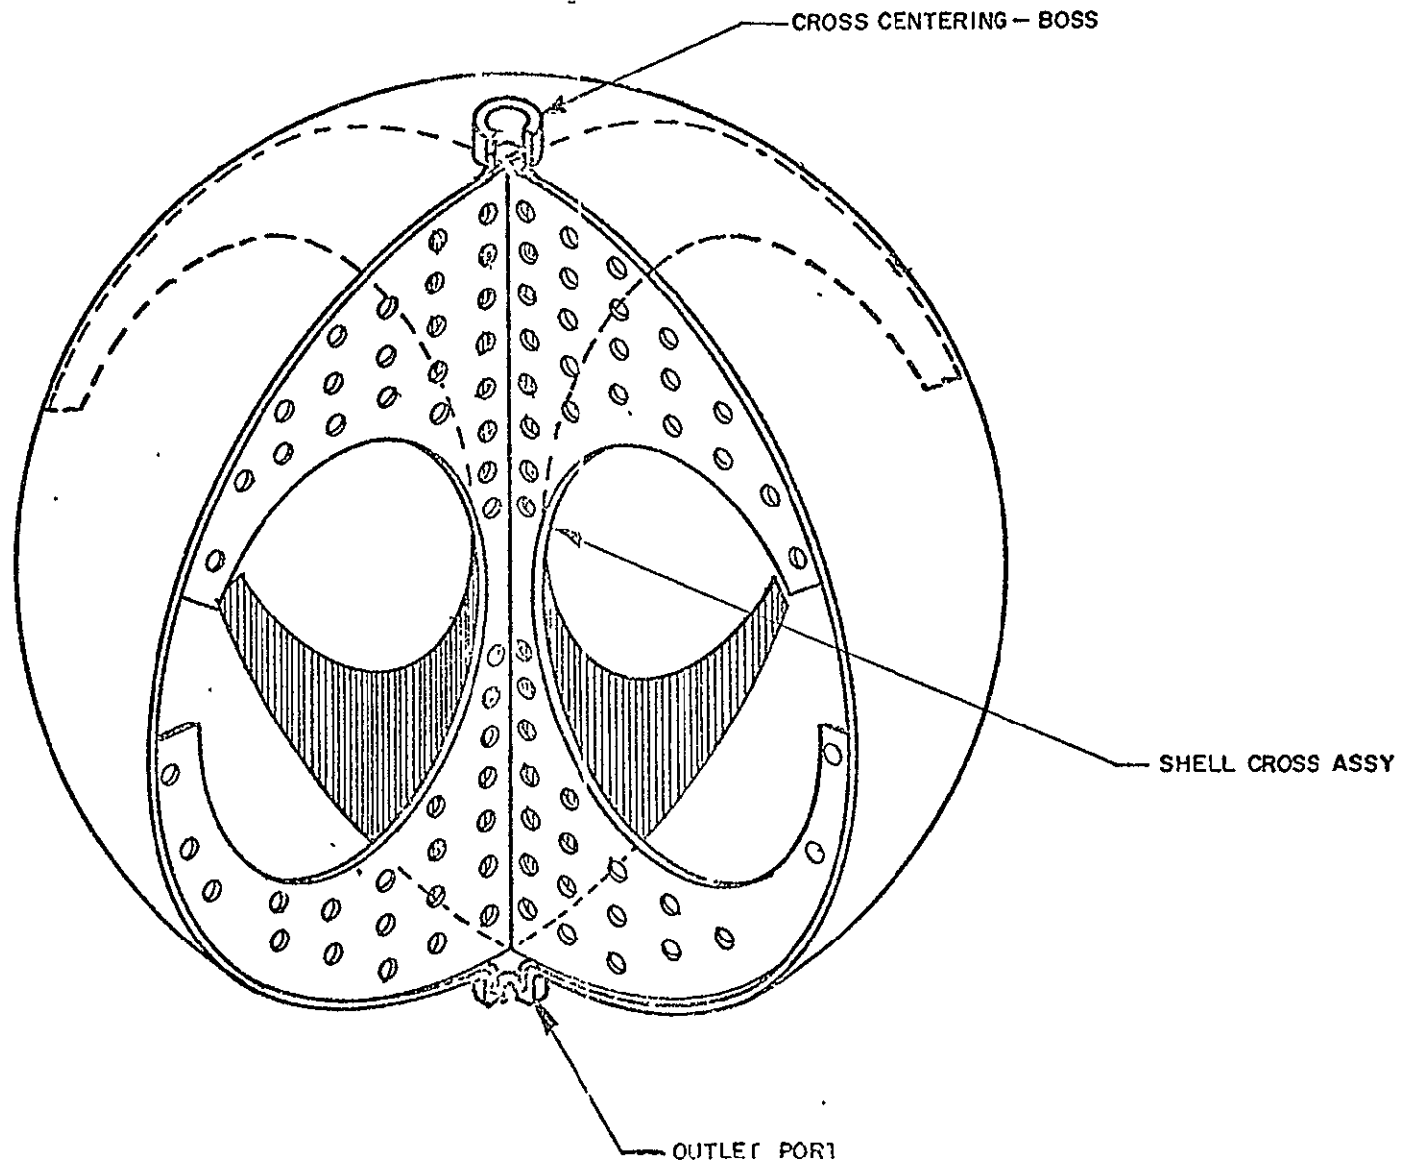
Symmetrical Cross Acquisition Device - Propellant Tank Assembly
